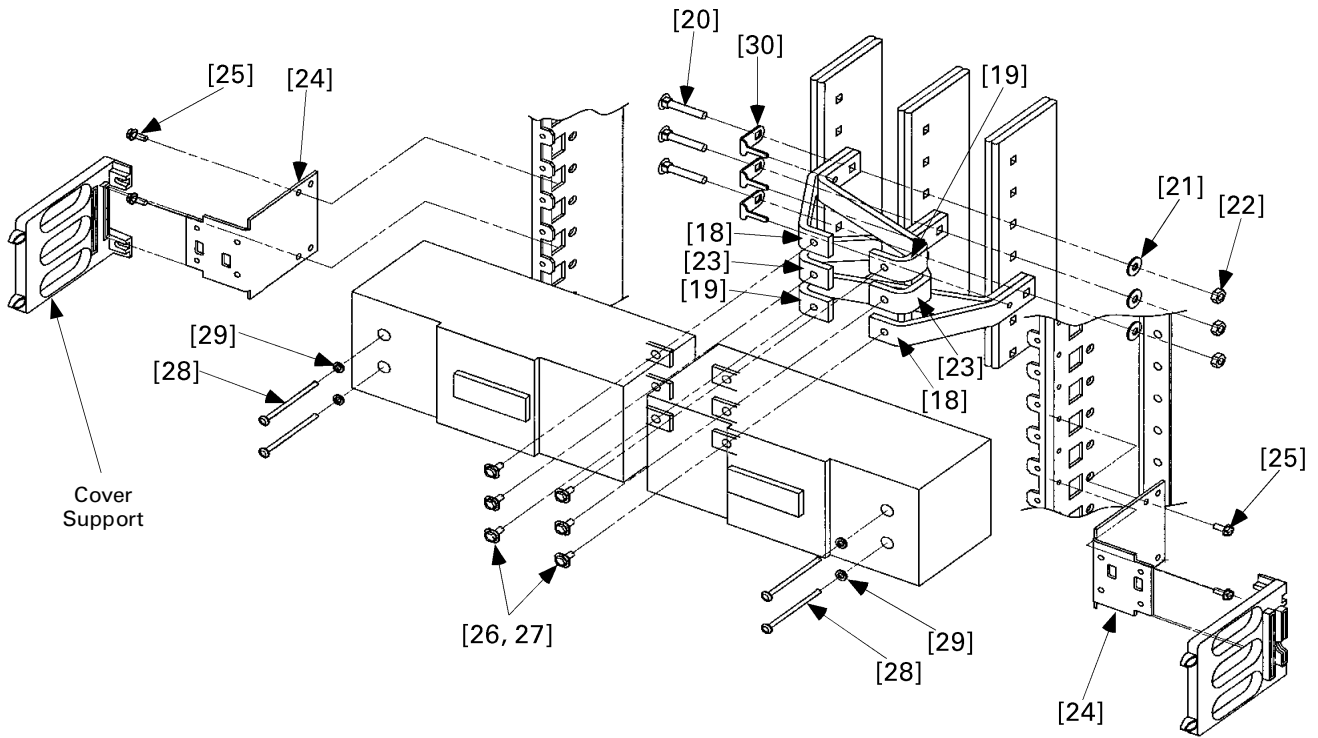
Double bolt-on circuit breaker assembly, exploded view.
